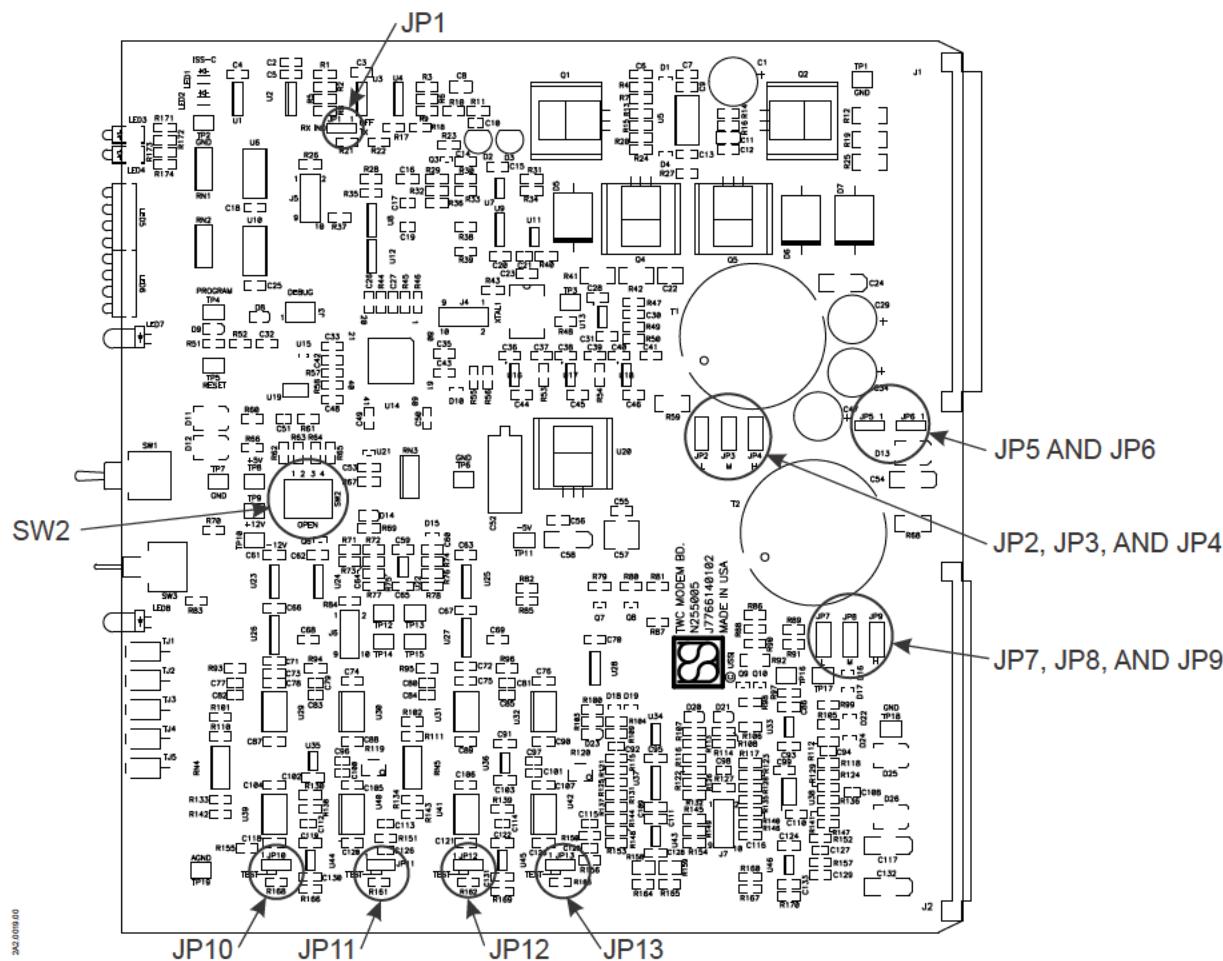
TWC Modem PCB Jumper and Switch Locations
